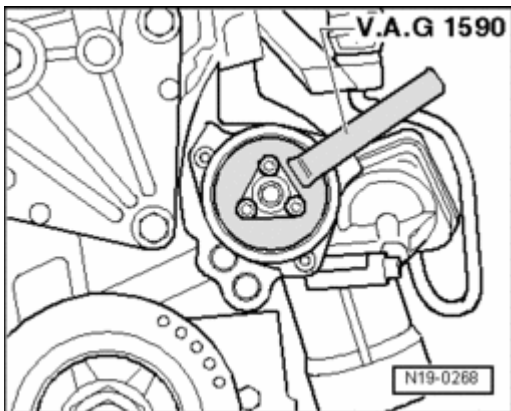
Removing Pulley; Counterhold Using Coolant Pump Spanner V.A.G 1590
